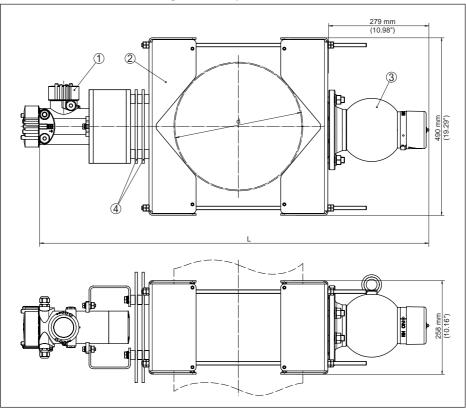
Mounting bracket with horizontally mounted sensor and heat protection kit
